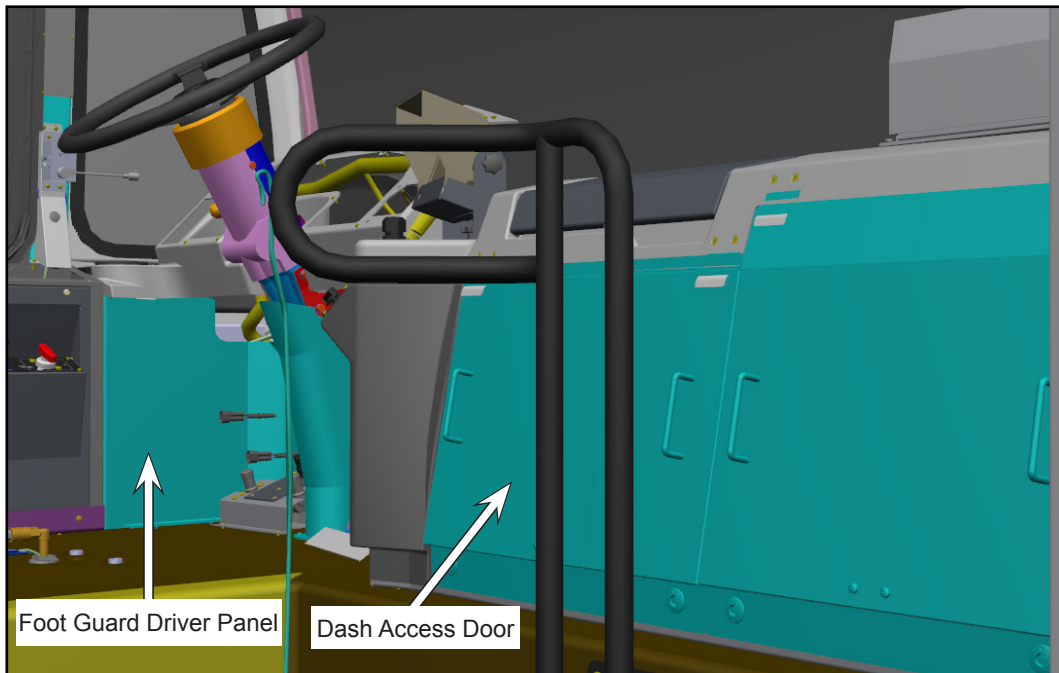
Typical View of Foot Guard Driver Panel and Dash Access Doors
